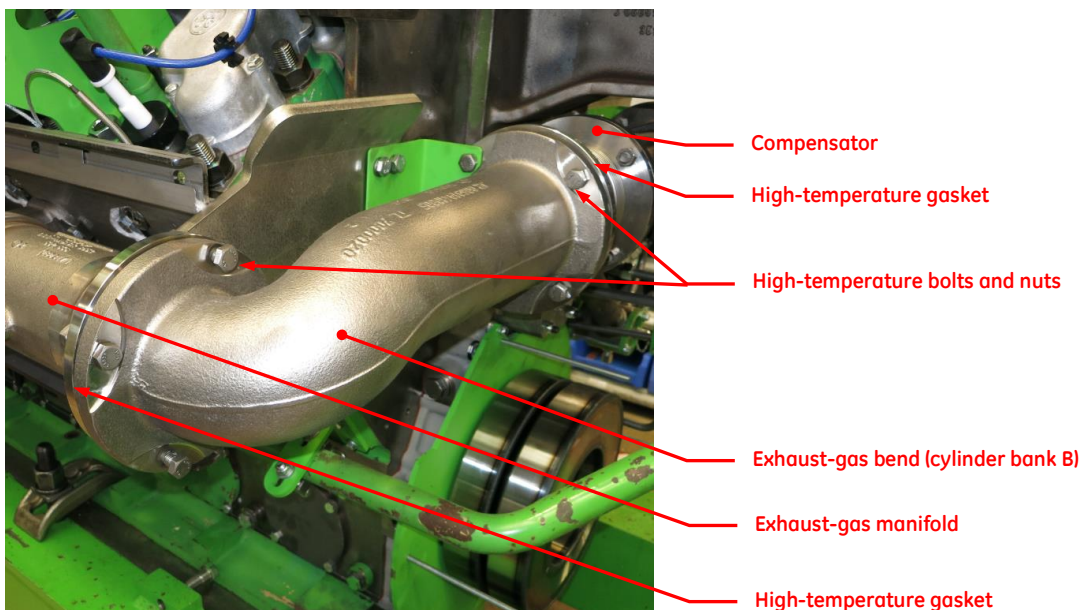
Fitting the exhaust-gas bends (cylinder bank B)
